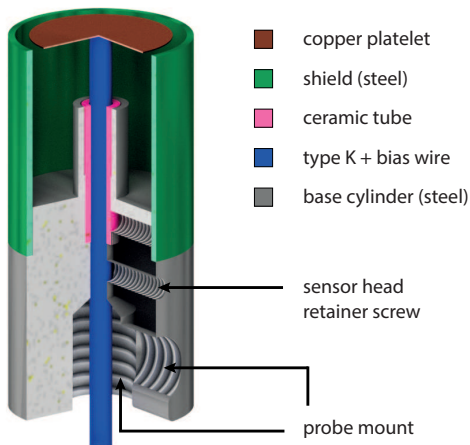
Schematic drawing of the PTP sensor head. The Type K thermocouple and the bias wire are spot-welded to the back of the copper platelet that represents the substrate. The whole sensor is housed in a stainless steel cylinder to shield it from any surrounding influences other than the ones coming from the upper half-space.
